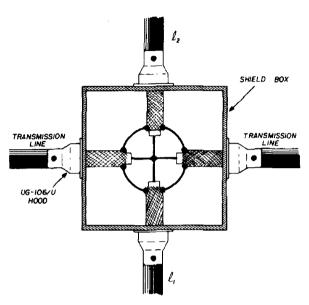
Typical assembly of vhf coaxial filter. Ends of coaxial lines are tinned and passed into brass box through UG-106/U hoods. Cable braid is soldered through holes in hood. The ends of the braid are jumpered together in the box with thin copper shim stock.
